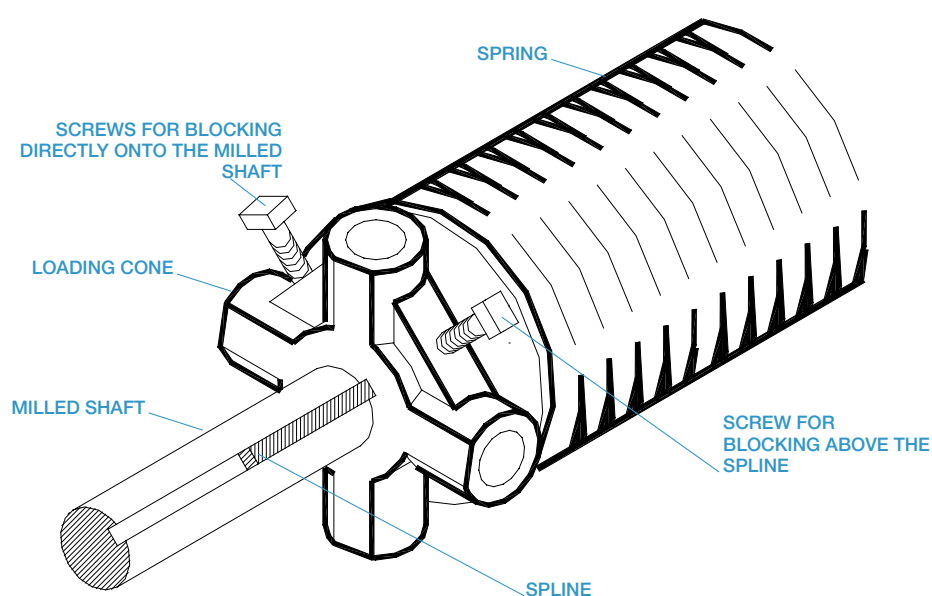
DIRECTION OF ROTATION FOR SPRING LOADINGFIG 51 SPRING HOLDER SHAFT LOCKING
